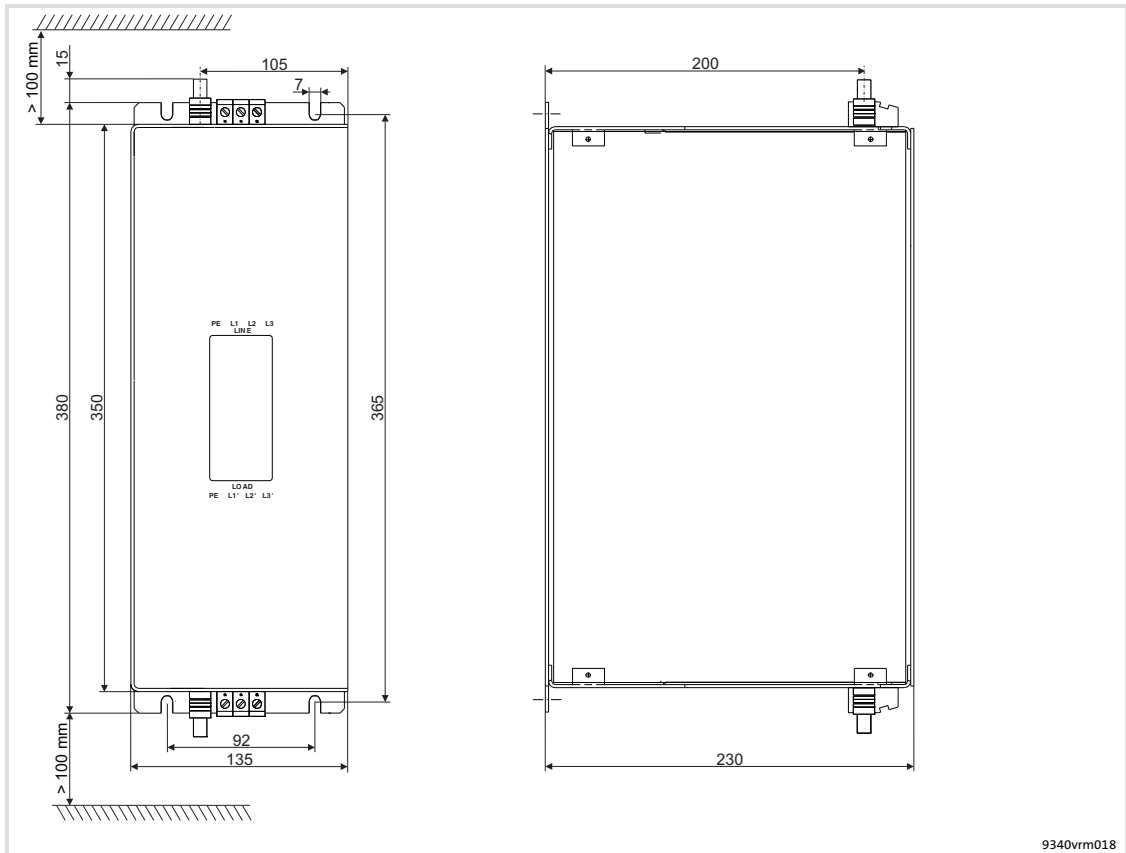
Dimensions of mains filter EZN3A0088H024 for EMB9342
